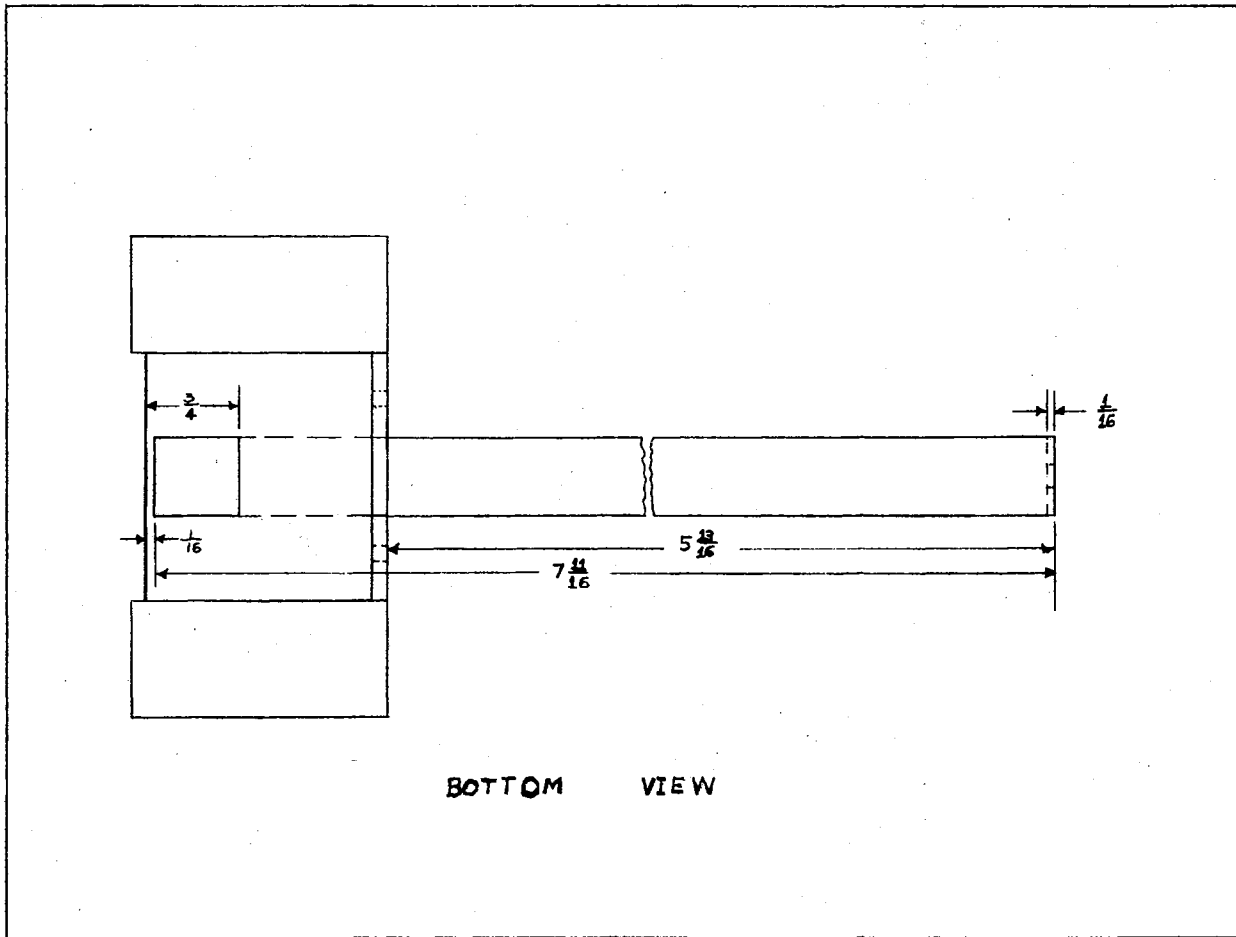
Detailed Dimensioned Drawing of the Bottom View of the Fusible Rod Containing Tube, and the Disk and Material Catch Tank Connecting Mechanism
